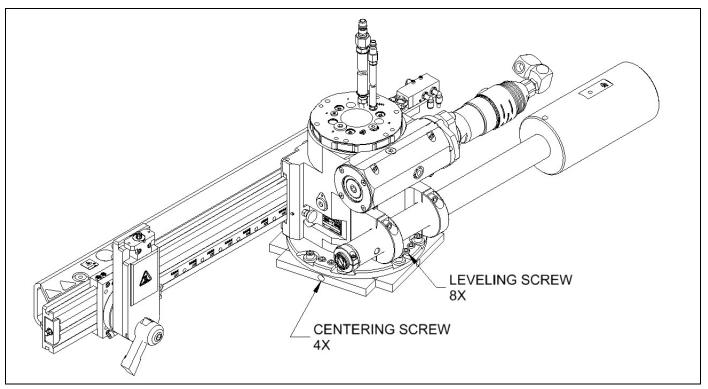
SURFACE MOUNT ASSEMBLY
